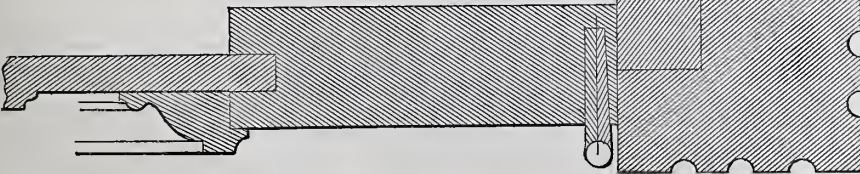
Horizontal Section through Corner, End Panel and Door, Half Size.
